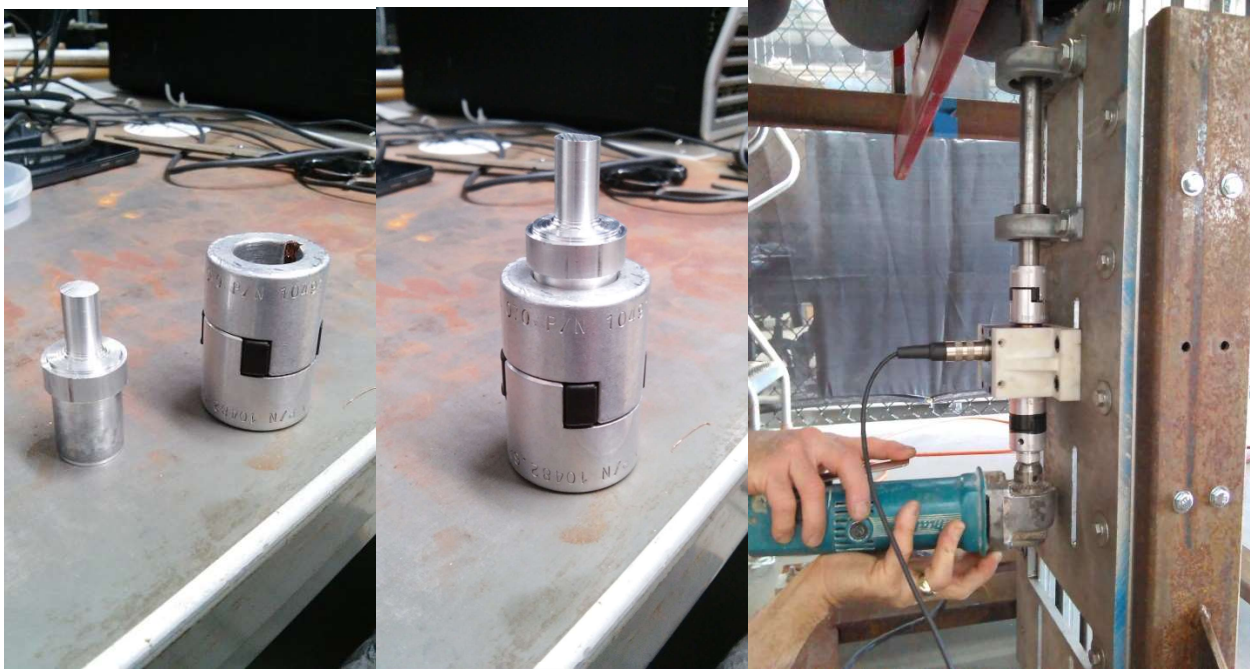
From the left in order: 1) Connection between drill and Shaft-torque sensor adapter. 2) Two connected parts. 3) Connected parts linked to the torque sensor and to the drill
